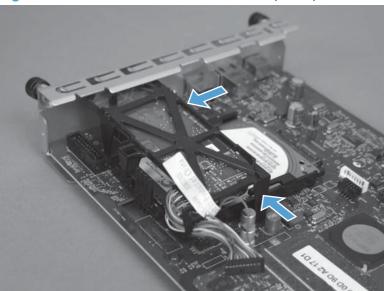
Remove the fax PCA and cable (1 of 2)
